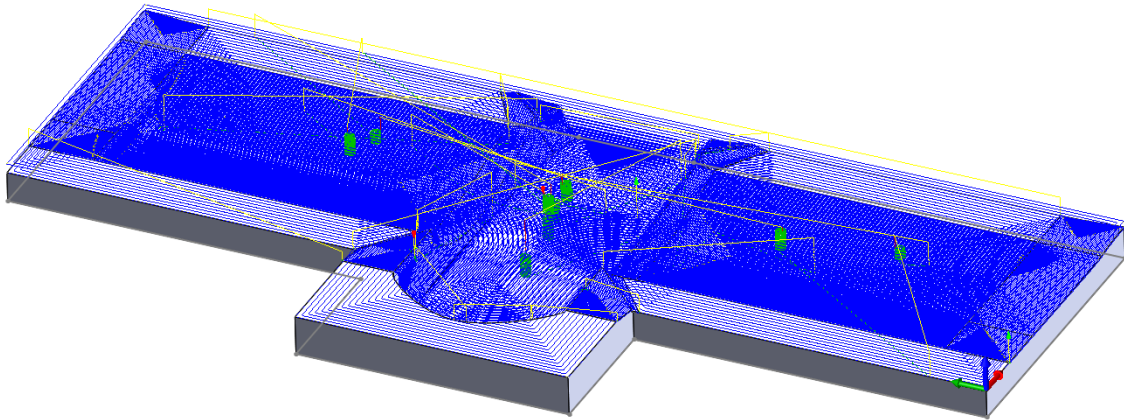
CAM of Front Half of Top Fuselage Mold
